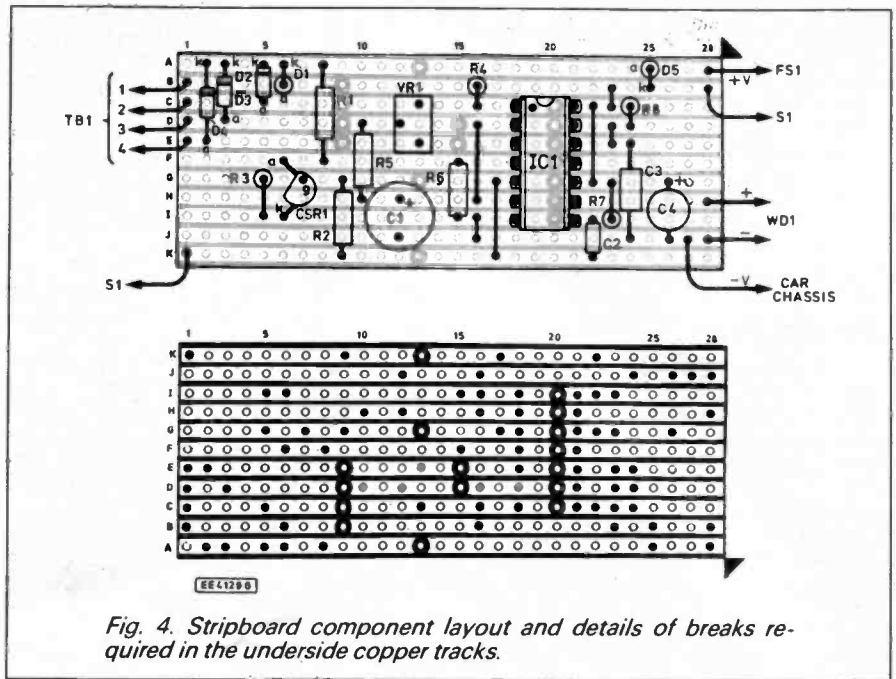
Stripboard component layout and details of breaks required in the underside copper tracks.
